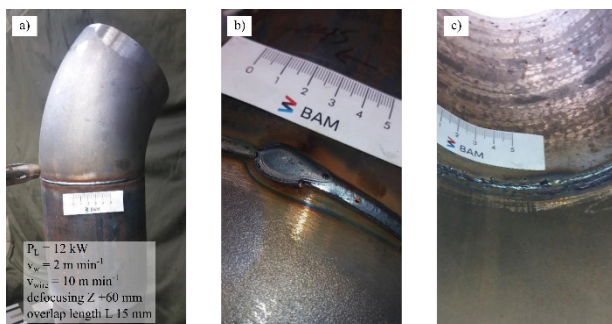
Hybrid laser-arc welded 12.5 mm thick pipe bend made of P235GH.
